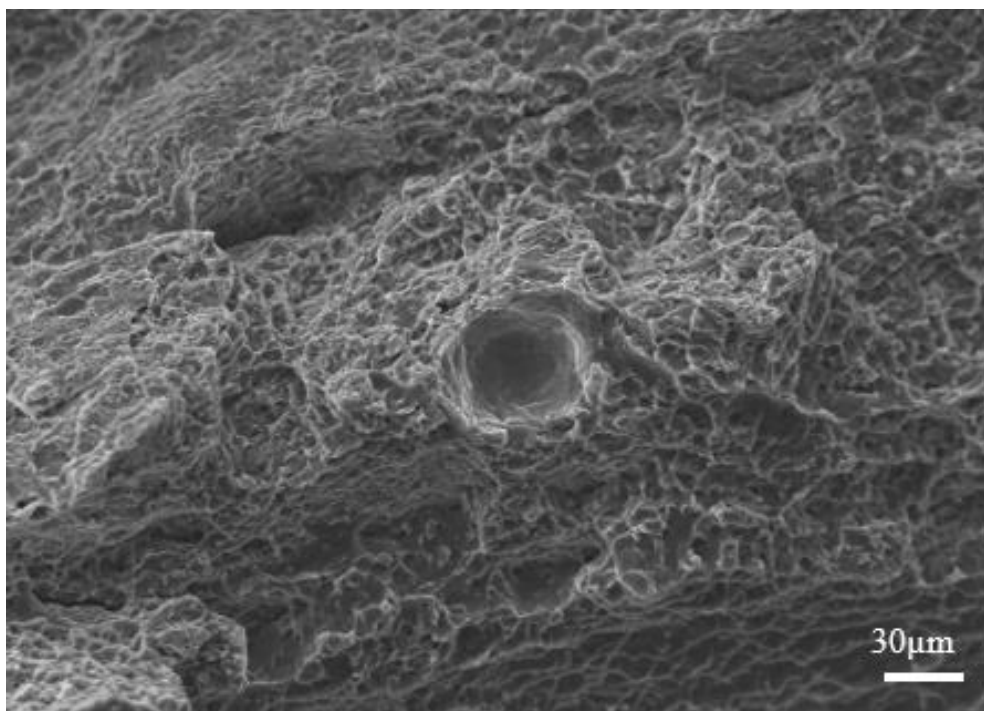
Porosity, dimples and small cracks on 90T fracture surface
